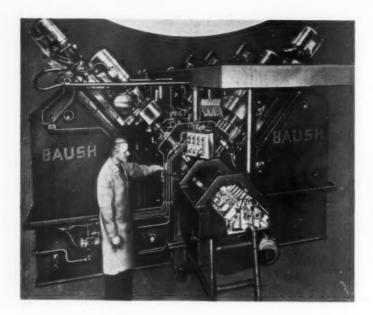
Baush non-platen transfer machine for processing cylinder blocks.
